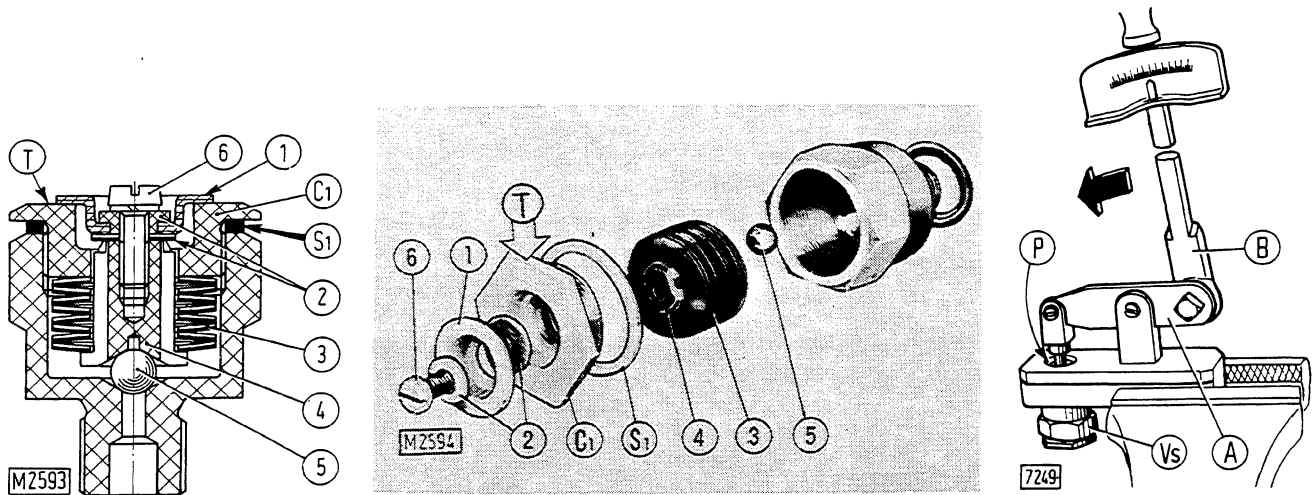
Track release hydraulic cylinder relief valve (Vs) components pressure adjustment and cross section.
